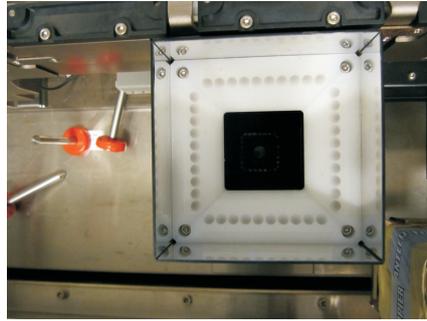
A camera unit for the pick-and-place head of Siemens Siplace 80 F4 that has to be visited separately during the placement process.
